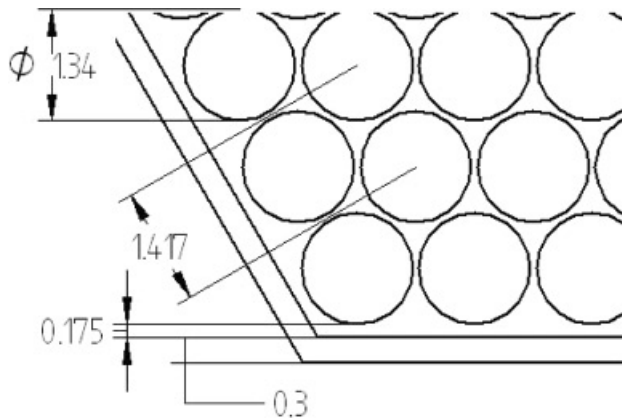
Fuel pin assembly cutaway (in centimeters).
